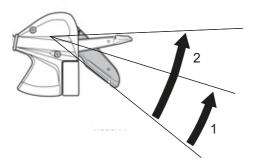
Switching gears with lever A, using gear shift SL-M315 as an example
